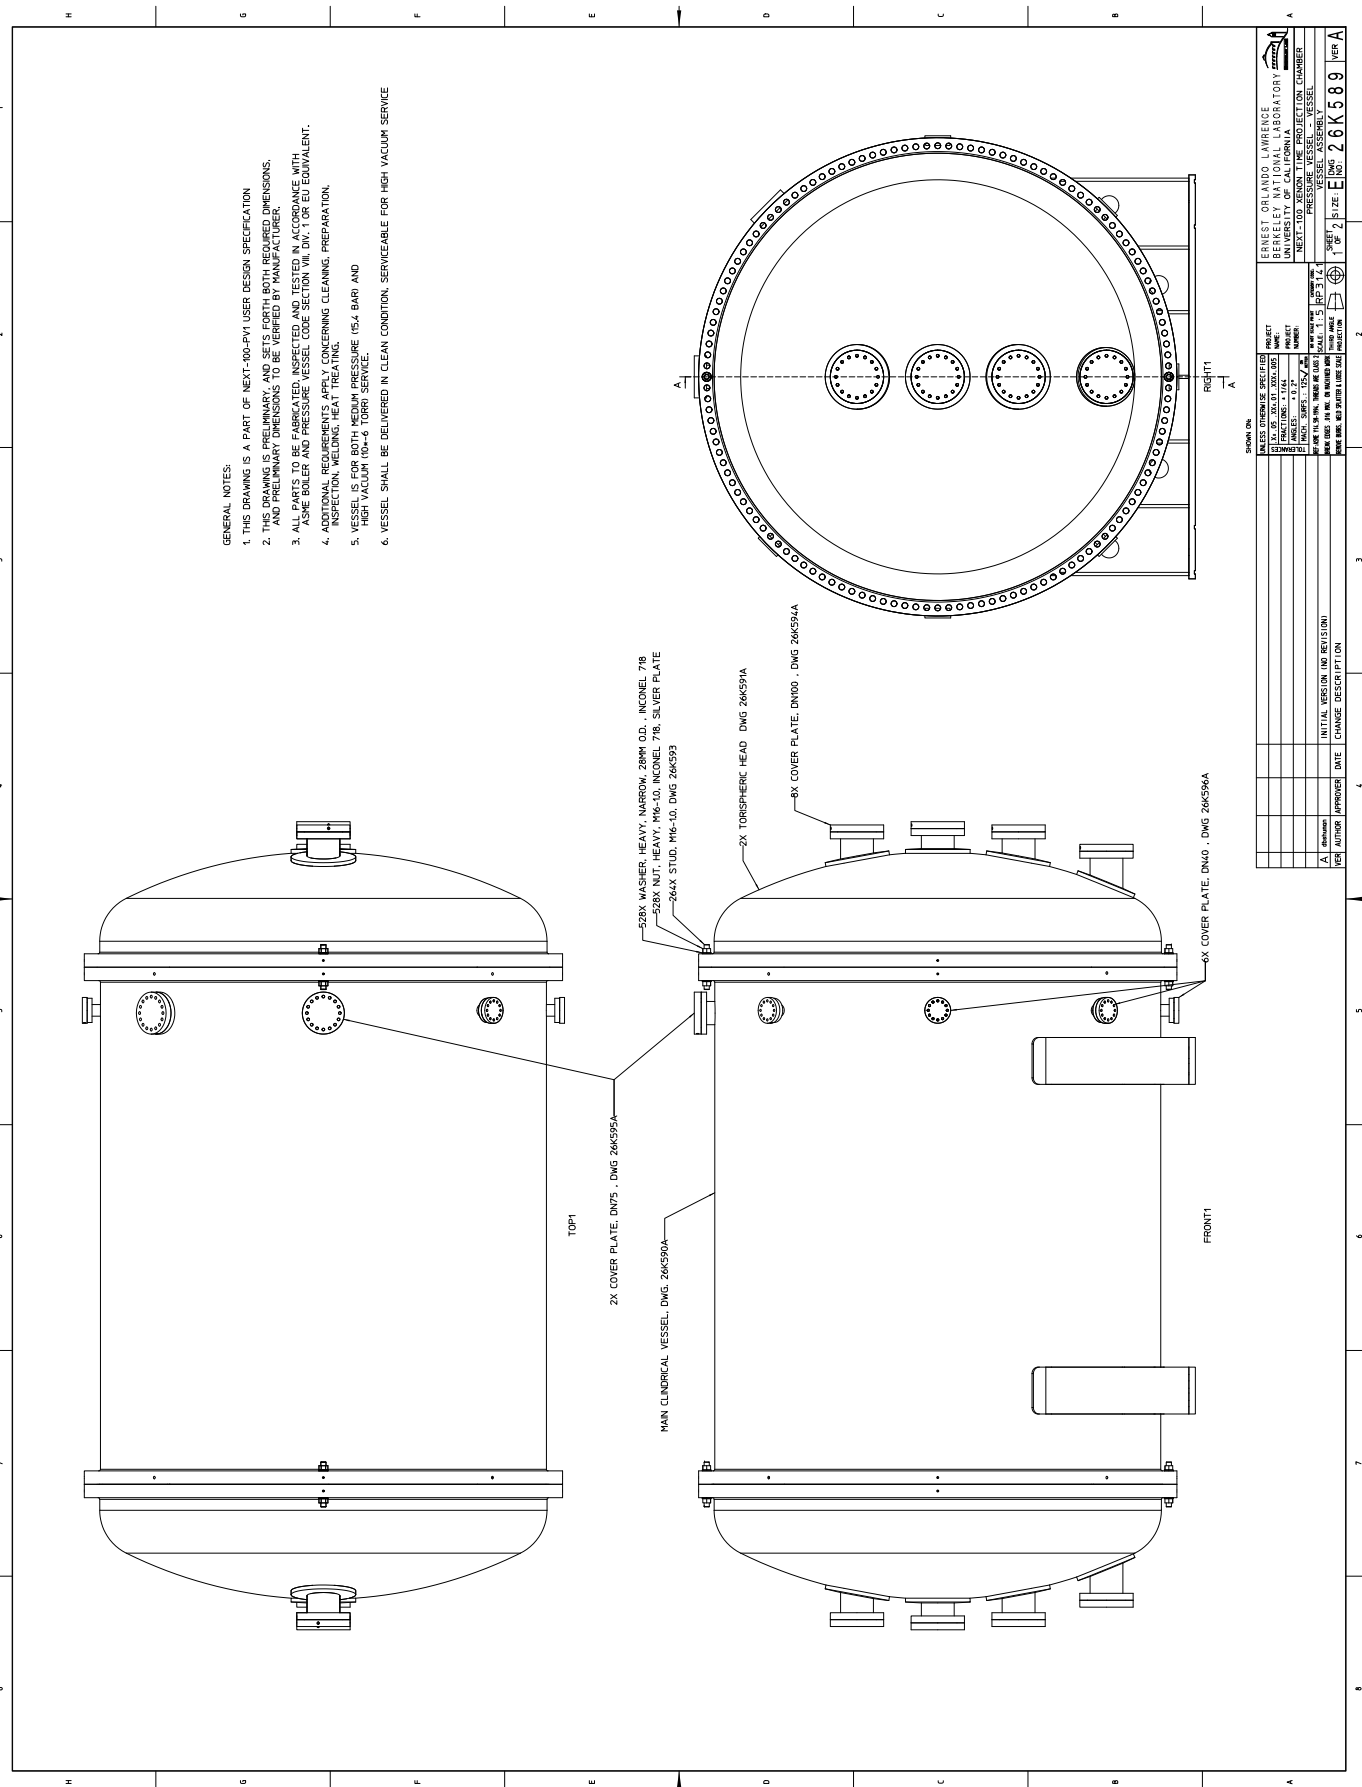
Vessel Assembly, as to be Delivered, sheet 1
